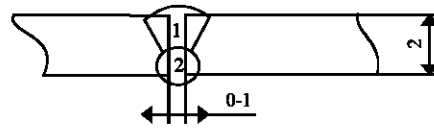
Groove shape and welding bead layout of the 2 mm plate
